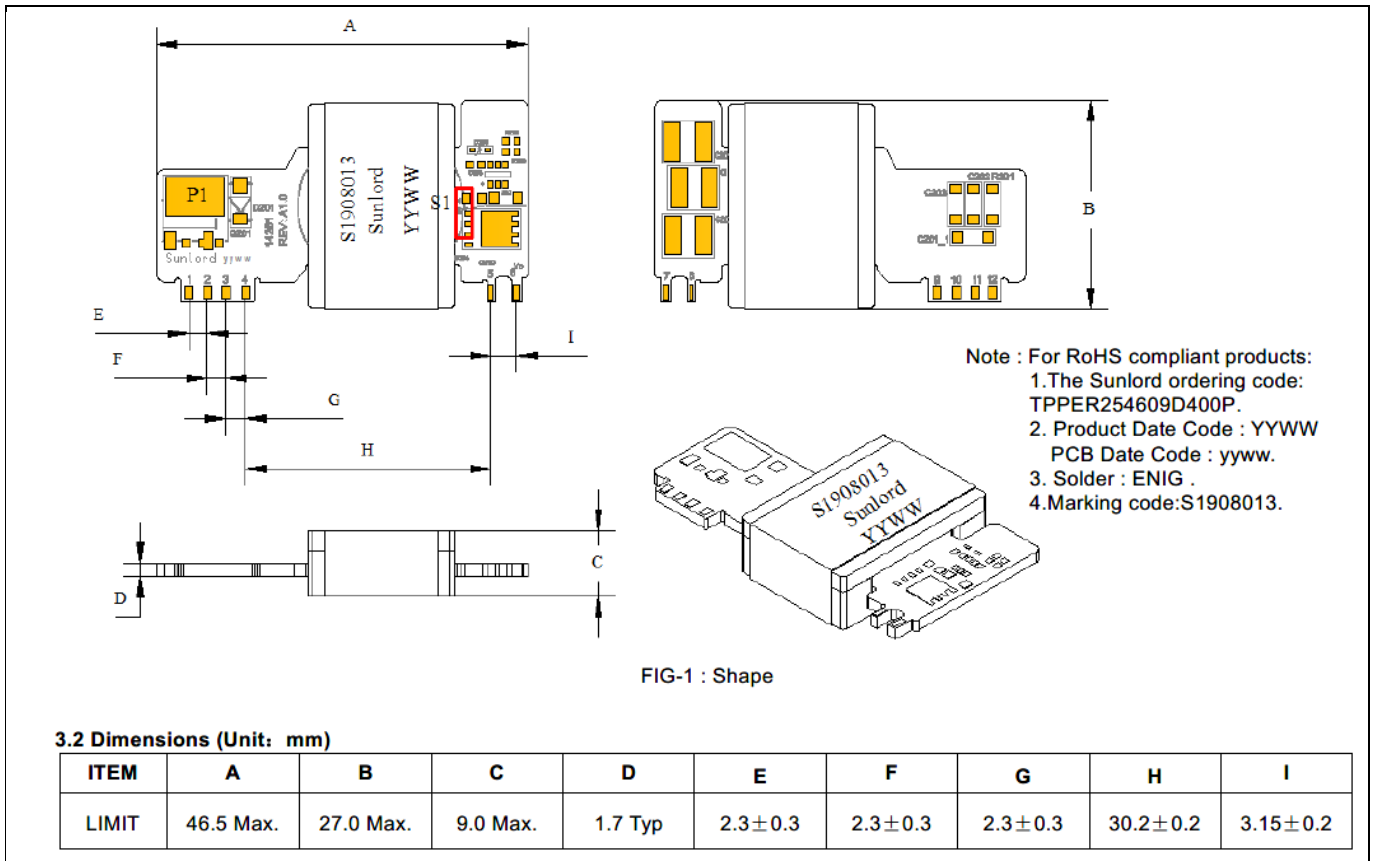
Flyback transformer board drawing – Sunlord TPPER254609D400P
